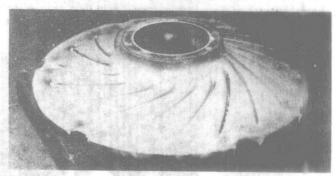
Monobloc Core for Two Dimensional Impeller with Outer Diameters over 500 mm.
